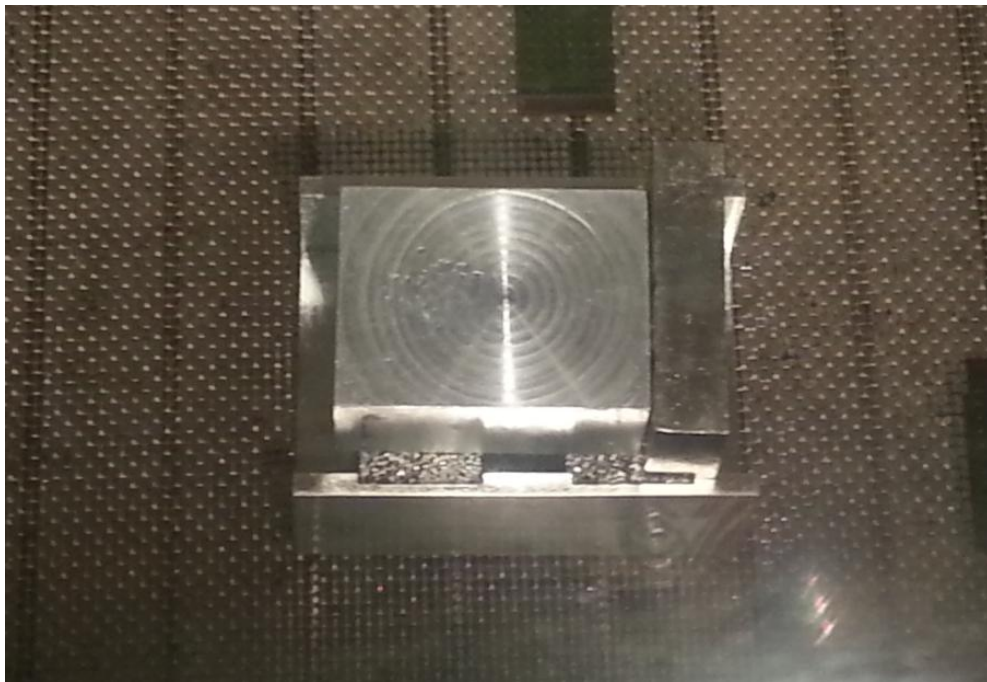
Detail photograph of test specimen in vapour phase machine with weights
